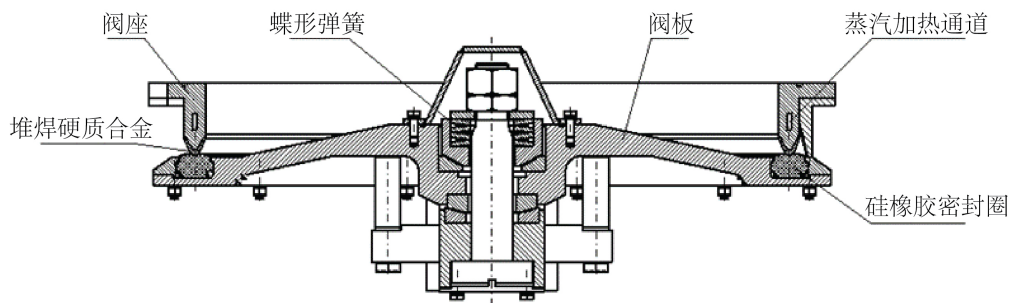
Structural drawing of the improved upper sealing valve plate and valve seat
